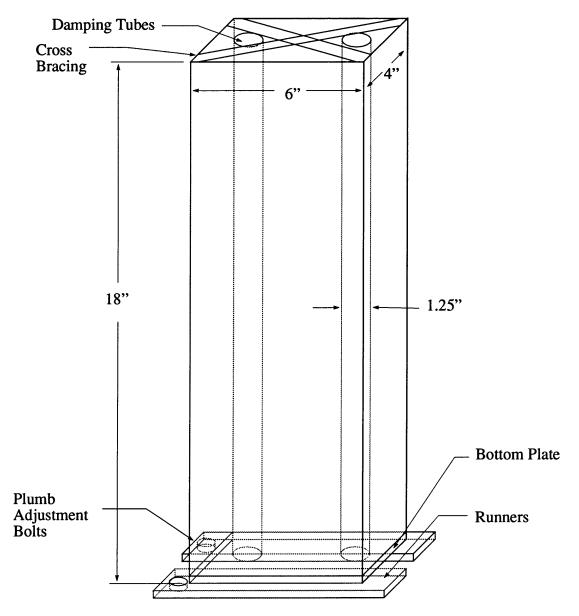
The Probe Support Post is made of heavy steel tubing with welded reinforcements. The post is filled with cast concrete and has two channels running the length filled with lead shot and oil to make the post "dead".
